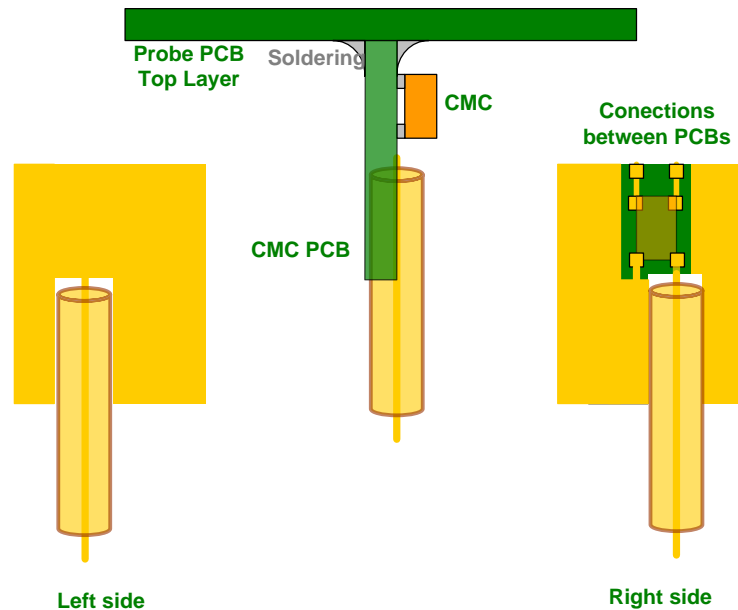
Supporting PCB with CMC for differential H_z probe
